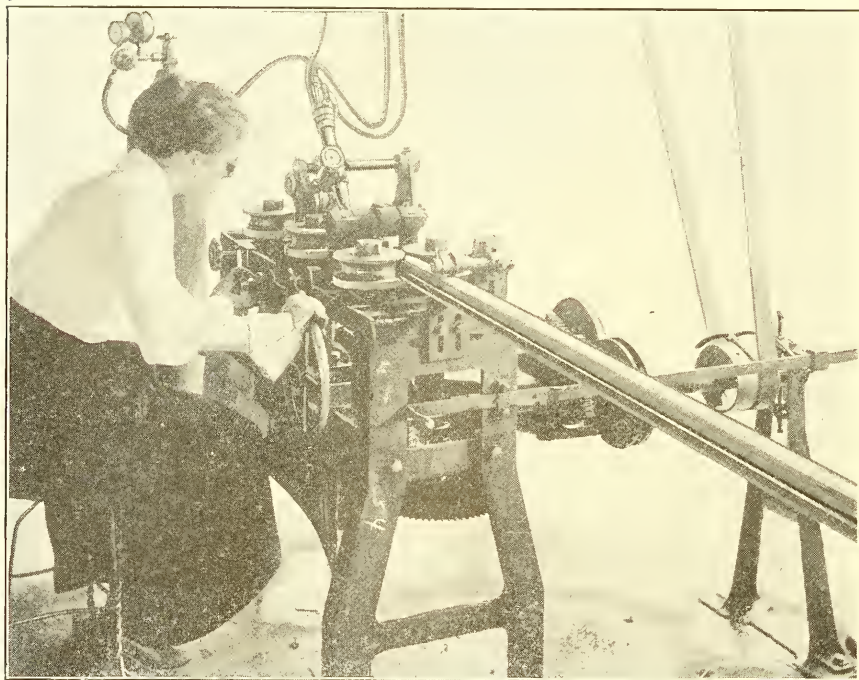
Feeding End of Tube-Welding Machine With Oxweld Multiple-Jet Gas Torch.
